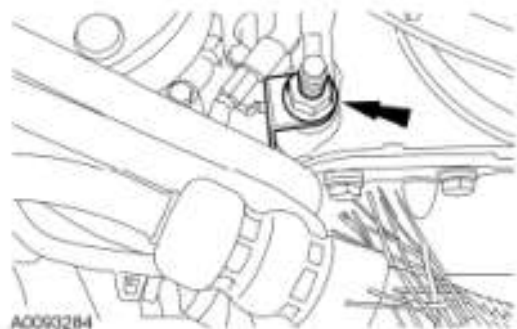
Locating RH And LH Exhaust Flange Nuts
